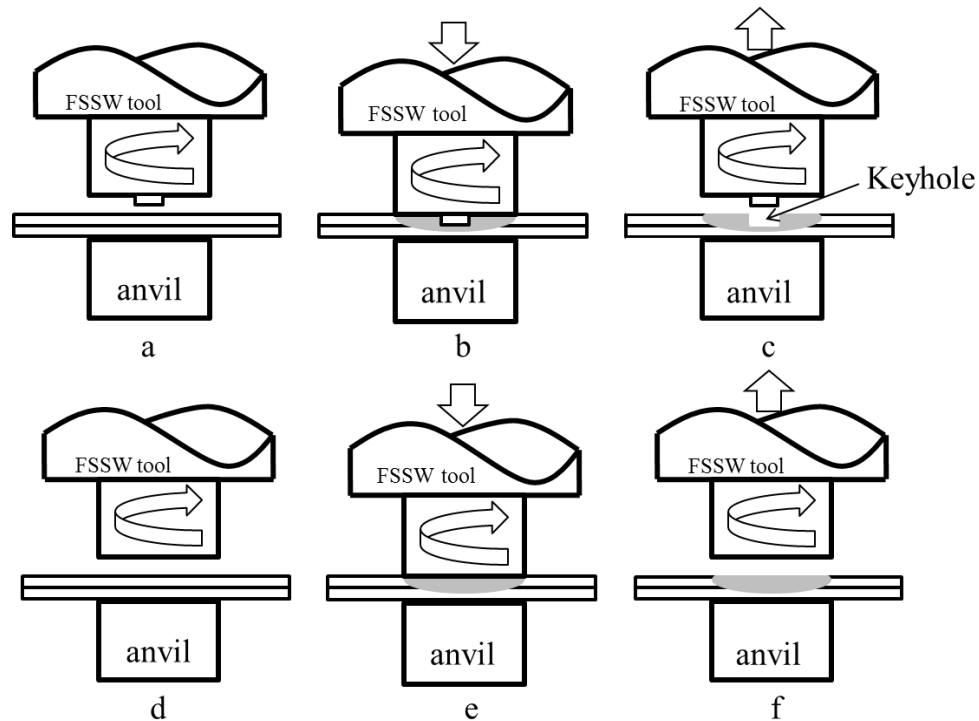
The Friction Stir Spot Welding Process. A-C: represents the traditional FSSW process using a tool with a pin. The resulting keyhole defect is illustrated. D-F: represents the FSSW process using a pinless tool. The lack of the keyhole defect is illustrated
